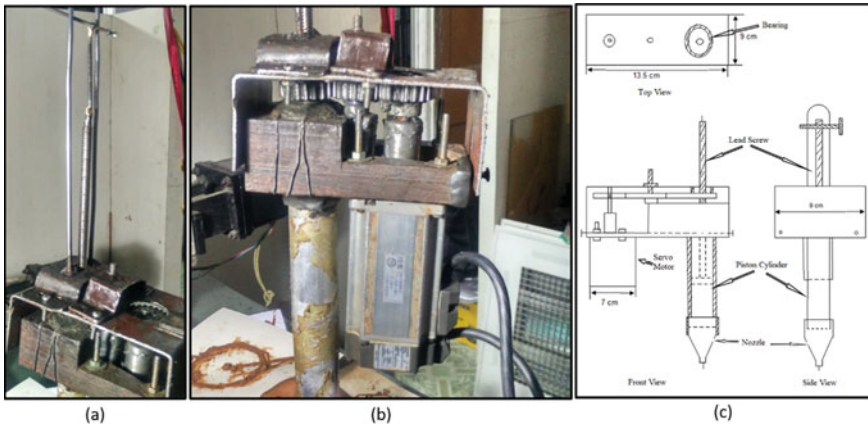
a Two rods to prevent the leadscrew from rotating, b final assembly of clay 3D printing attachment, and c line diagram of 3D printer assembly
